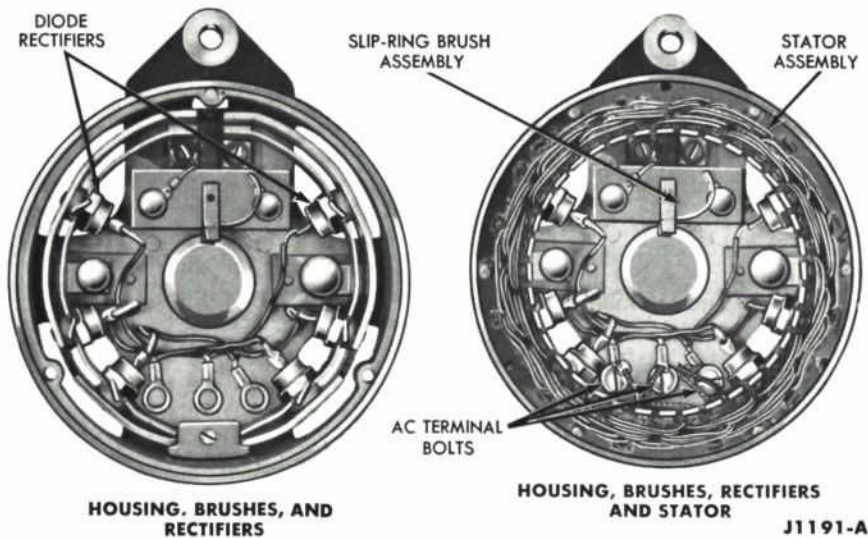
60 Ampere Truck Slip-Ring End Housing, Rectifier and Stator Assembly
